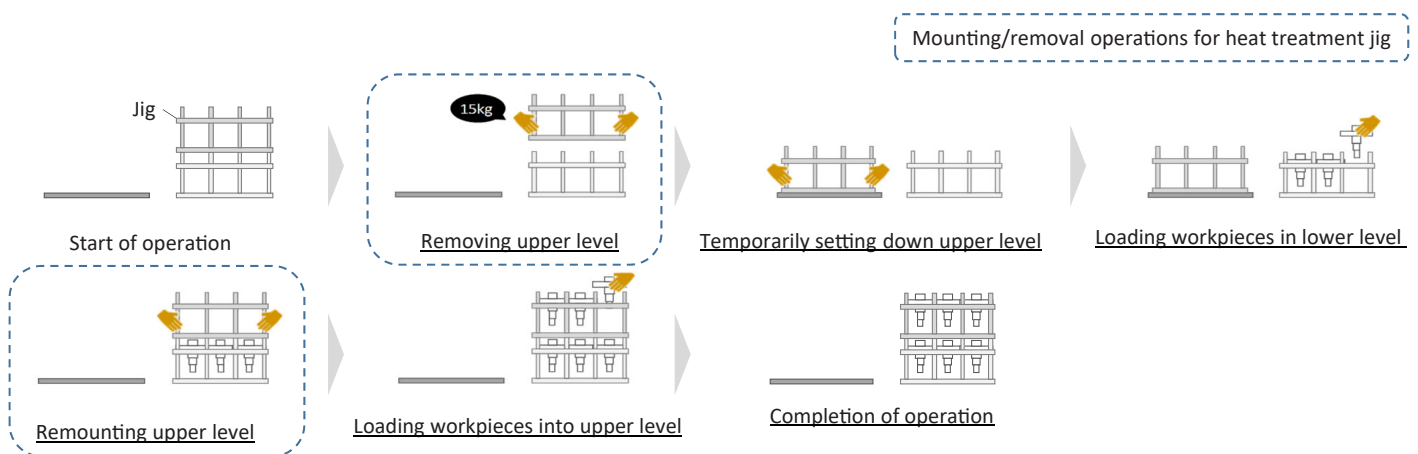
Process of loading pulleys in jigs on trolleys for heat treatment
